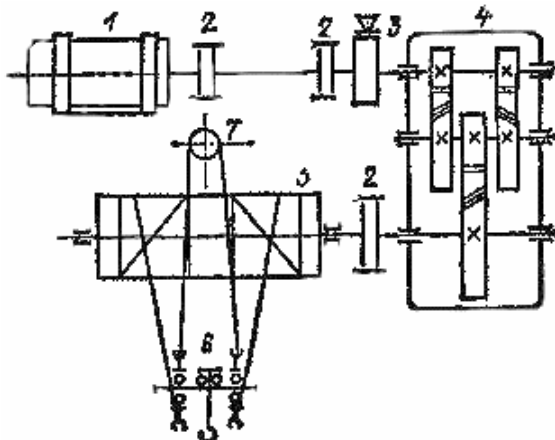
Kinematic diagram of the lifting mechanism: 1 – engine; 2 – clutch; 3 – brake; 4 – gearbox; 5 – drum; 6 – polyspast; 7 – fixed block of polyspast
